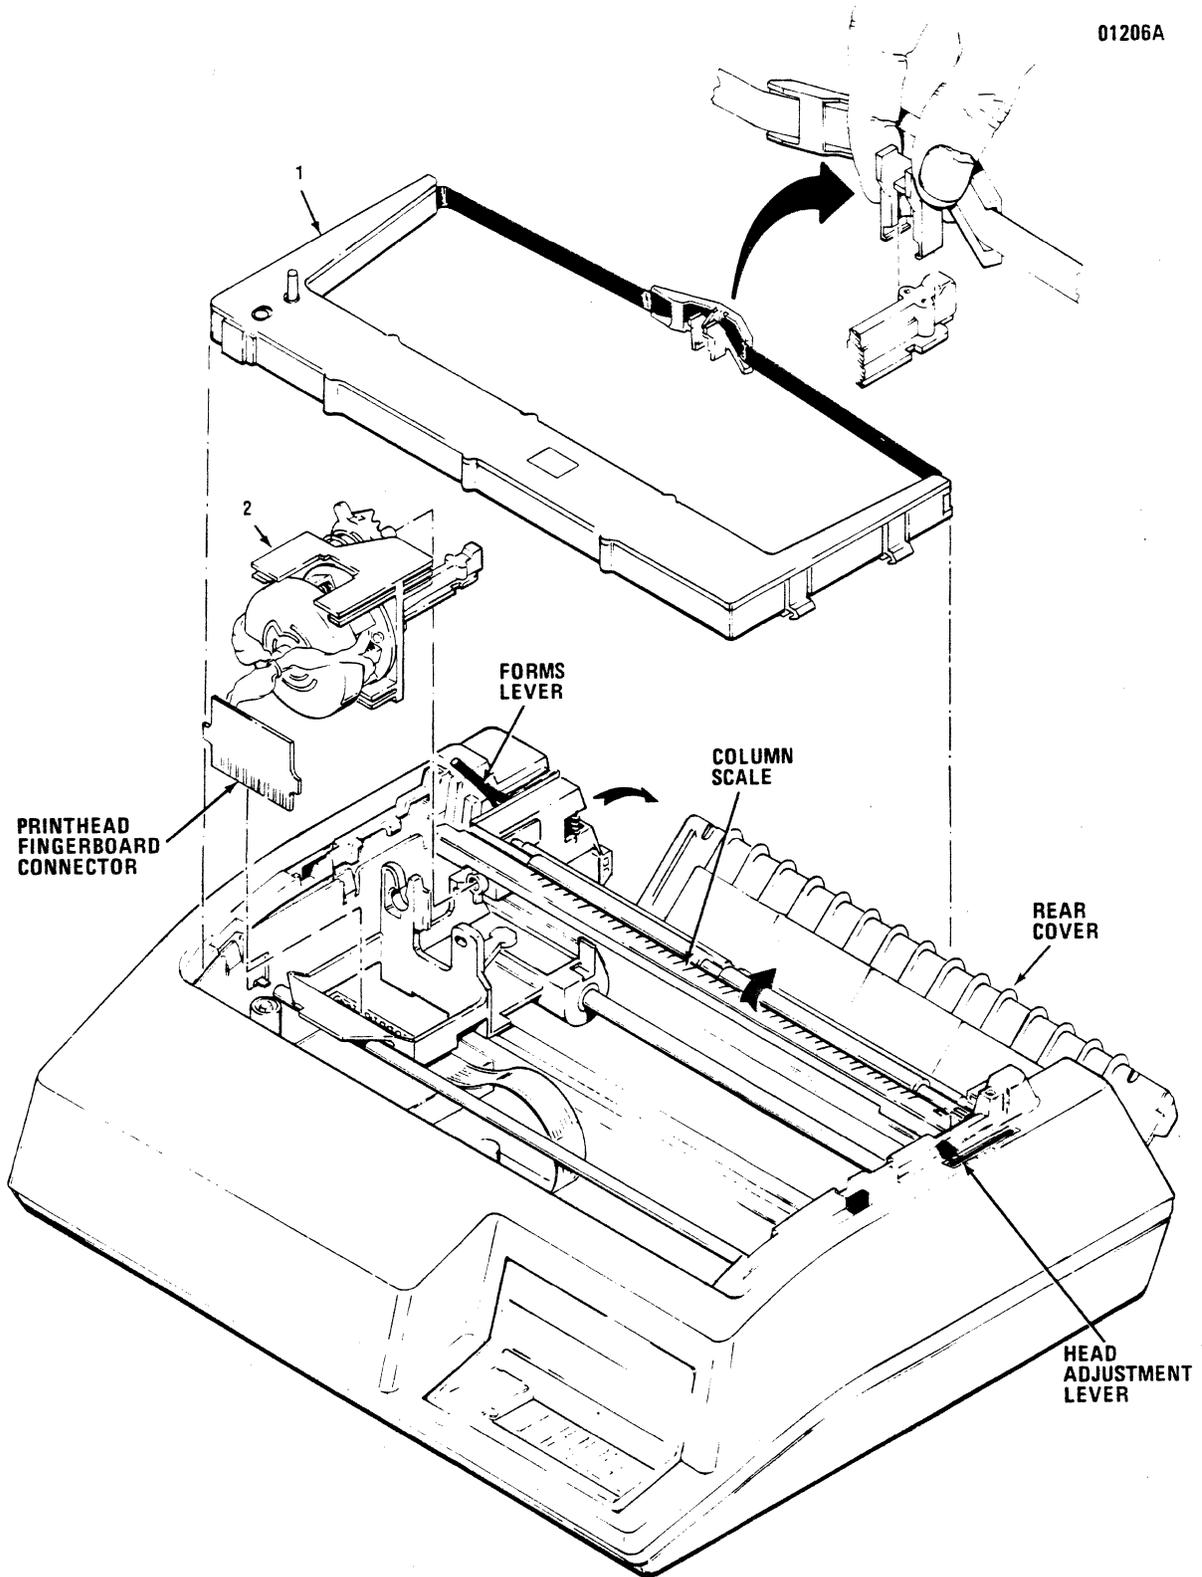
Removal/Replacement, Ribbon Cassette and Guide, Print Head Assembly
